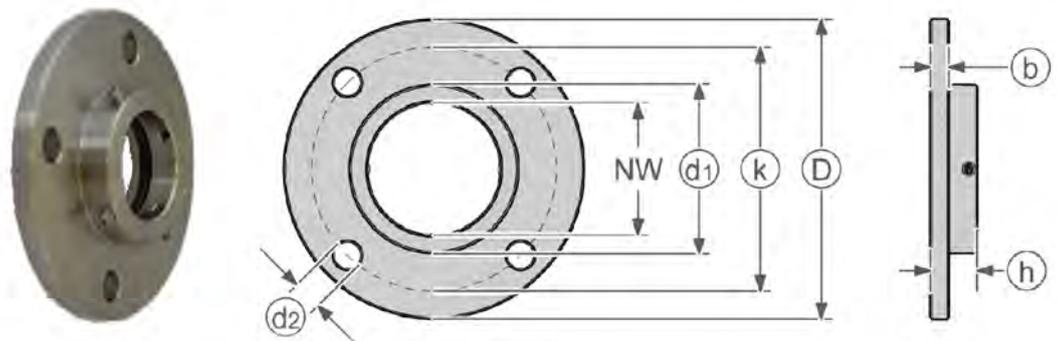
Dimensions of the sliding flange of the GFI pilot burner
